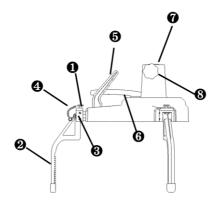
Wheel Clamp (Tire Clamp) AUTEL-CSC0500/17
